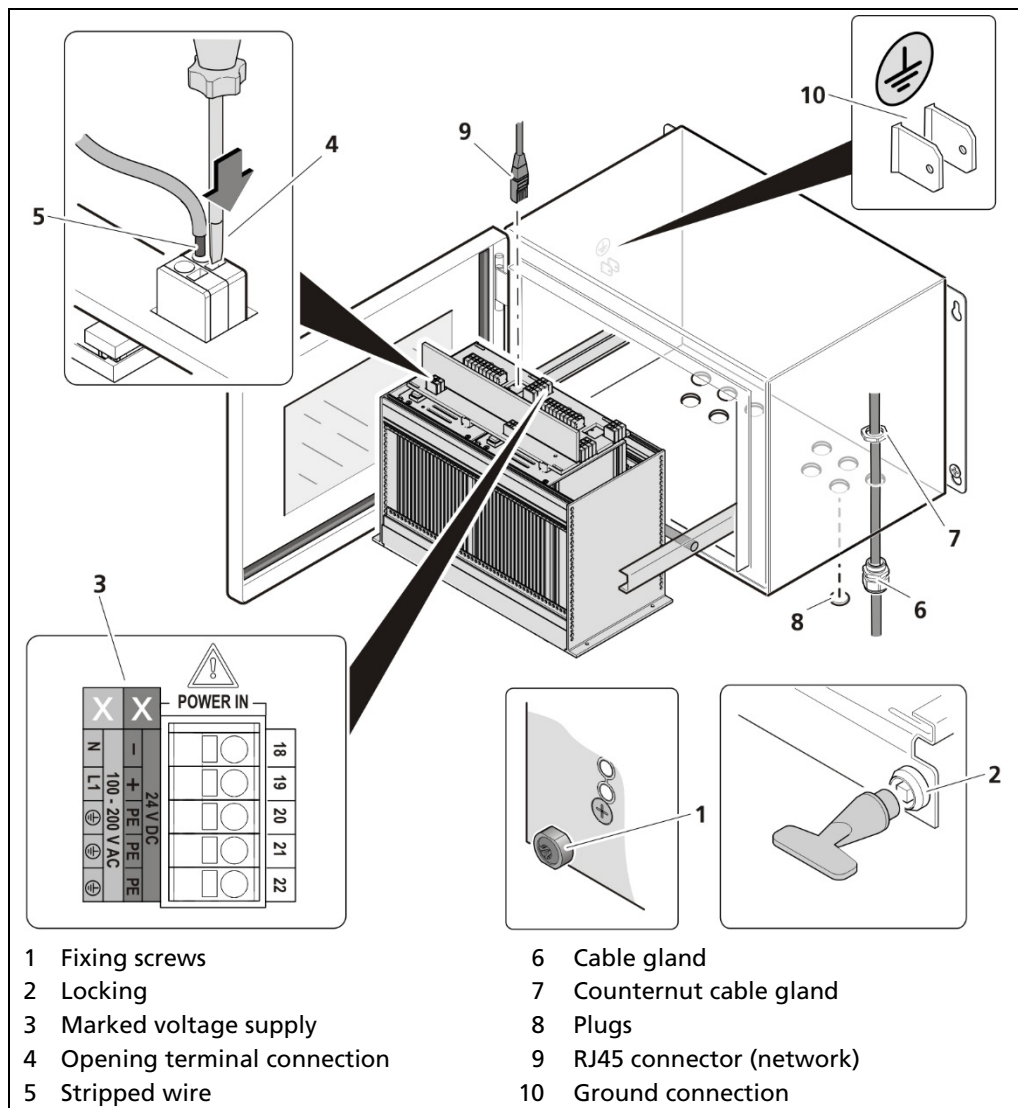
Electrical connection in the wall housing (example 2x master EVU at backplane)
